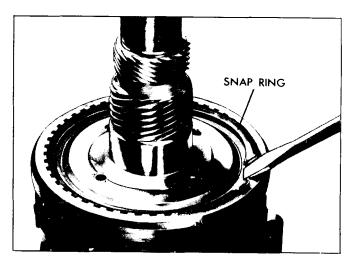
E-84 Disengaging Snap Ring from Output Carrier
